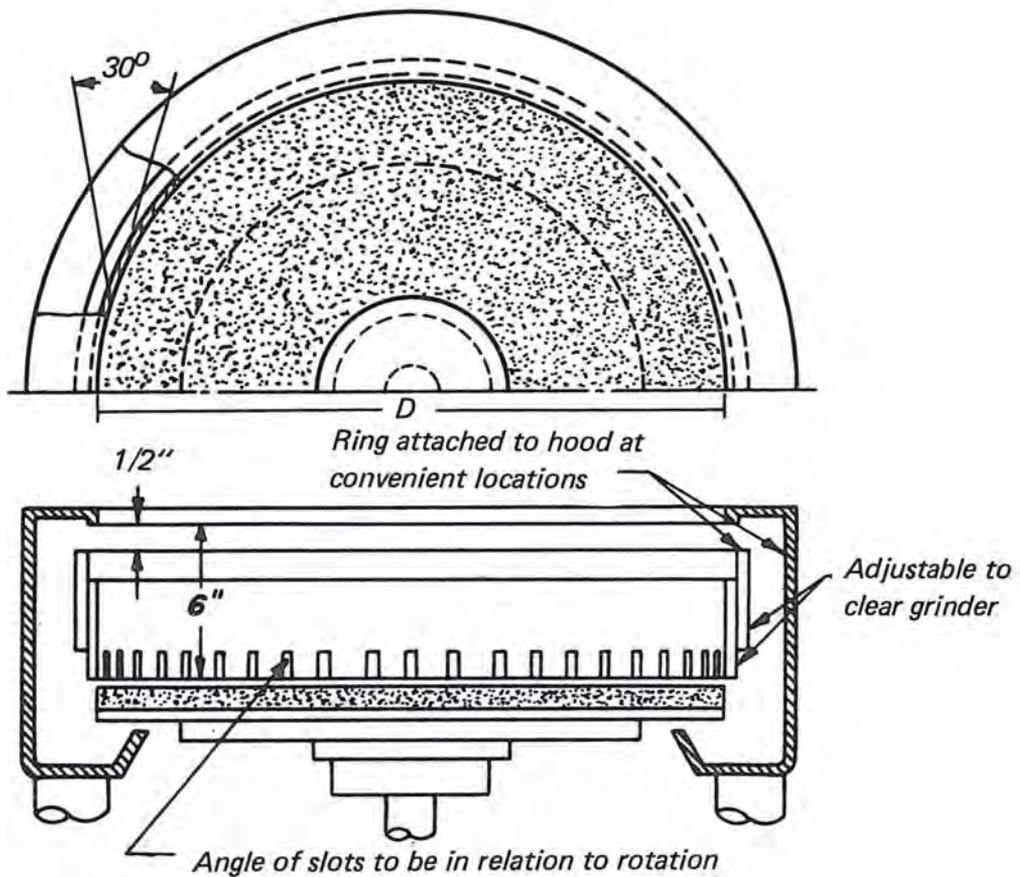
PEDESTAL-TYPE GRINDER WITH SHAPED HOOD
